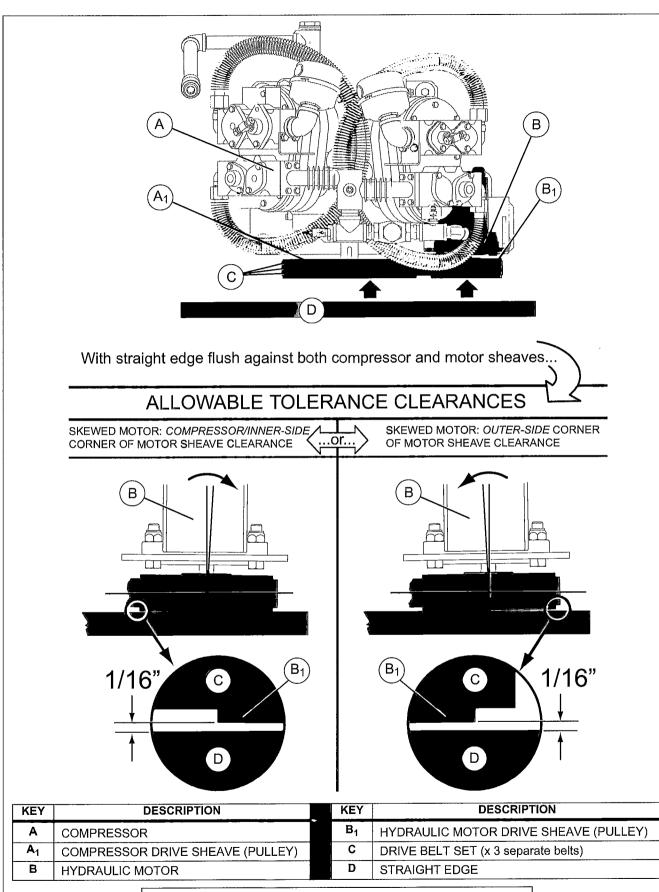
Drive Sheave (Pulley) Alignment Check
